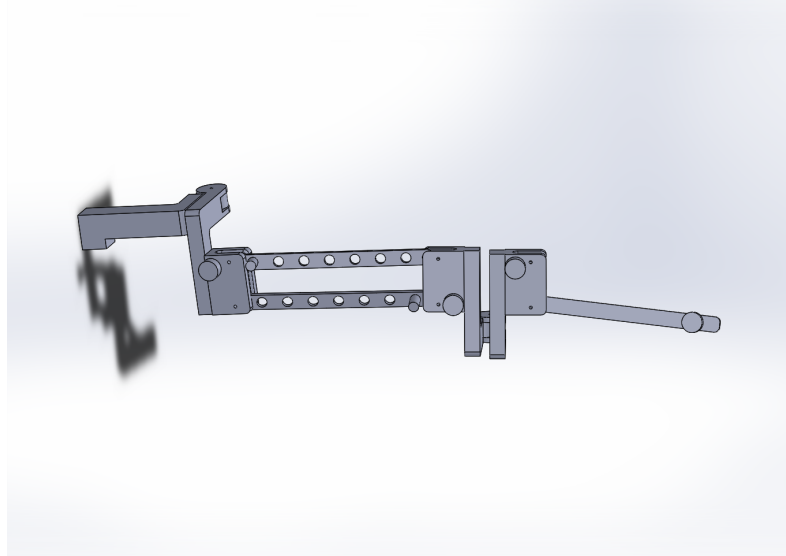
3D Assembly of WREX, assembly consists of seven parts fastened together with the use of bolts and nuts.
